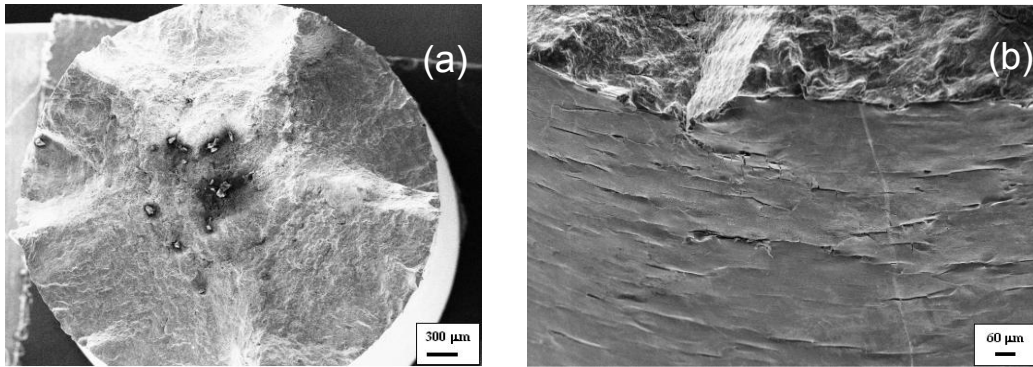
Macroscopic aspect of the fracture surface of the nitrided AISI 304 steel test specimen stress-tested at 600 MPa and fractured after 10,100 cycles: (a) fracture surface showing ratchet marks; (b) lateral surface of a nucleation site. The presence of numerous microcracks on the surface of the nitrided layer gives rise to various nucleation sites in the fracture region.
